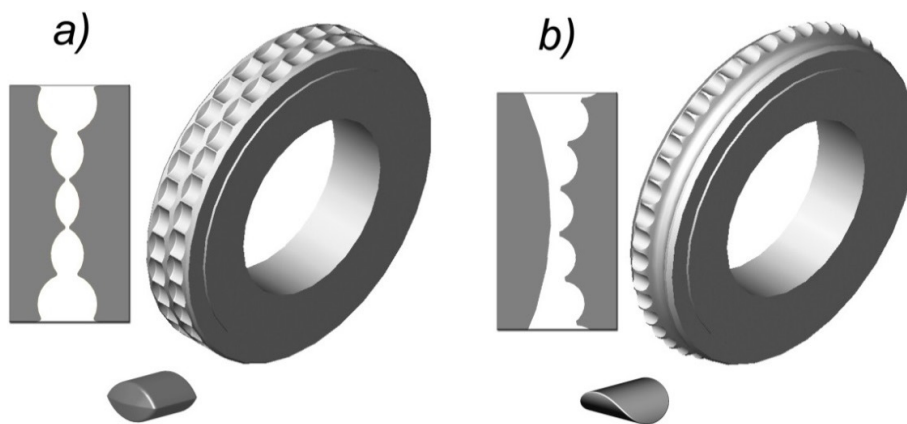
Examples of roller press forming rollers to produce briquettes: a) in the shape of a drop, b) in the shape of a saddle
